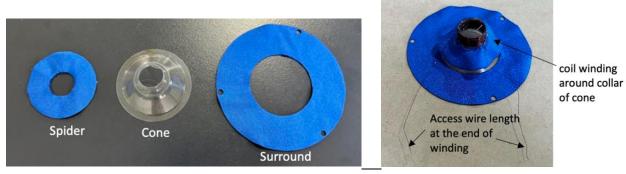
(left) Provided vacuum-formed cone and laser-cut fabric, (right) cone assembly
